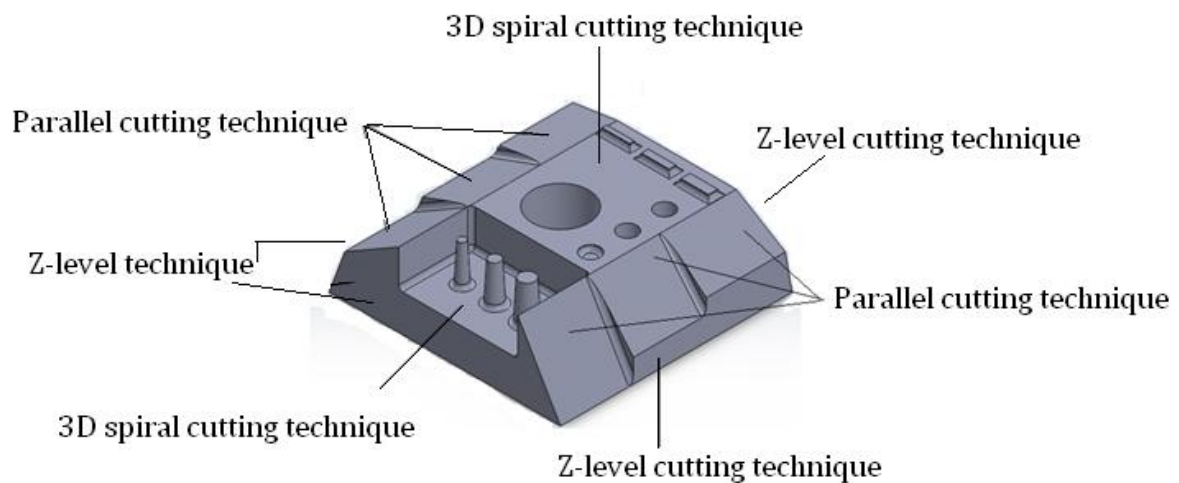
Used cutting techniques for CNC machining of the test pieces
